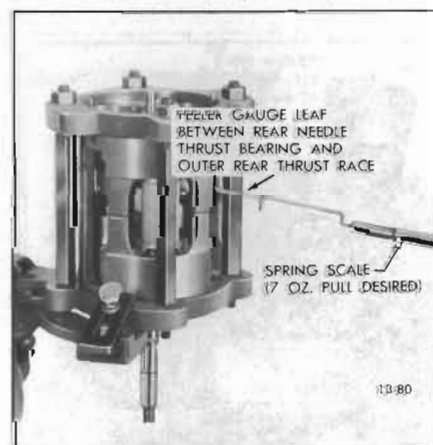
Checking "Drag" on Selected Feeler Gauge Leaf with Spring Scale
